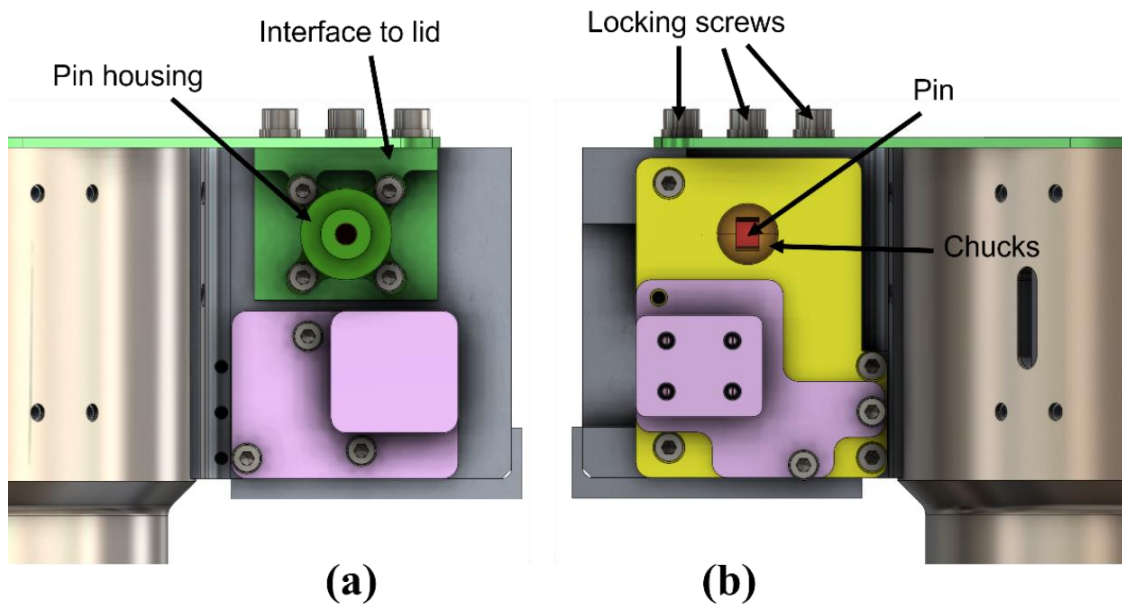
Locking mechanism of the lid of SDOM: (a) back view of the mechanism, (b) front view of the mechanism.
